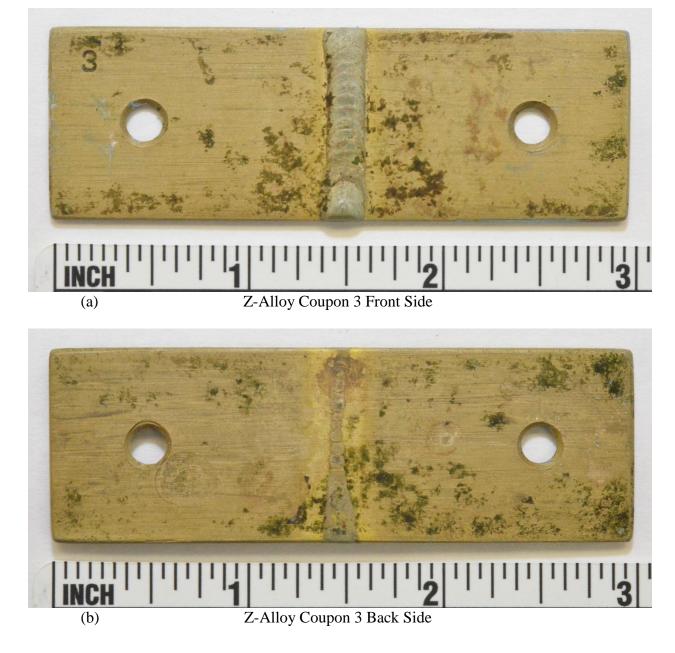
Photographs of Z-Alloy coupon 3 (a) front and (b) back side after a 10 month corrosion test.
